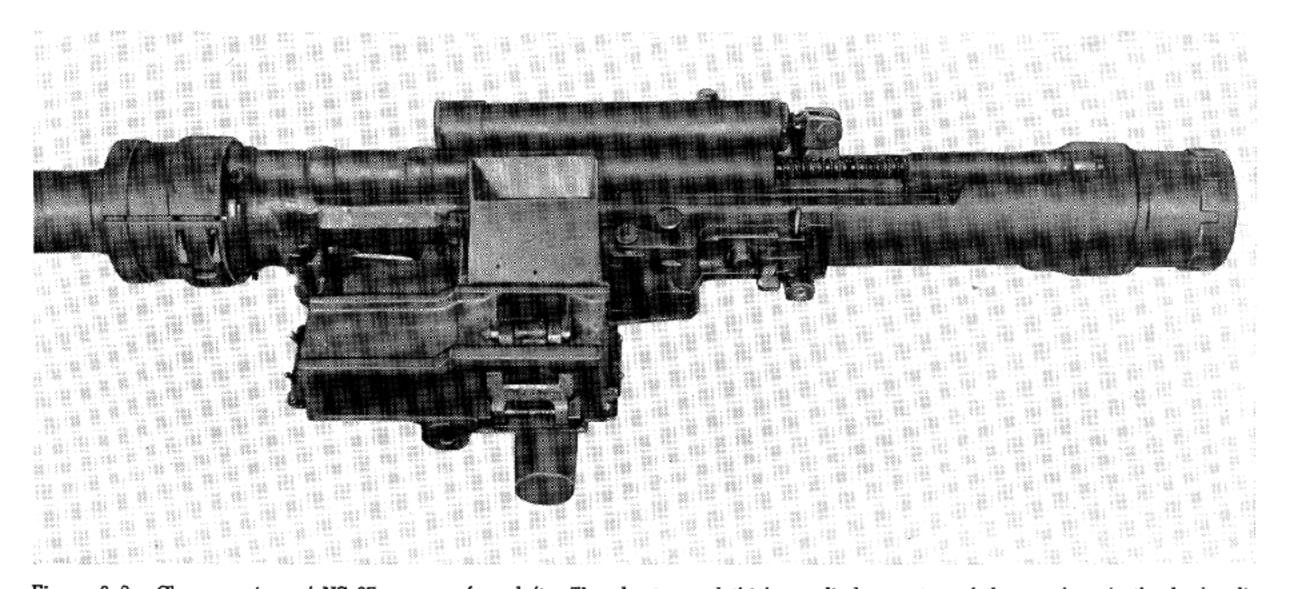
Close-up view of NS 37-mm gun from left. The shorter and thicker cylinder on top of the receiver is the hydraulic counter-recoil control. Link ejection chute is clearly visible on top of feed tray.
